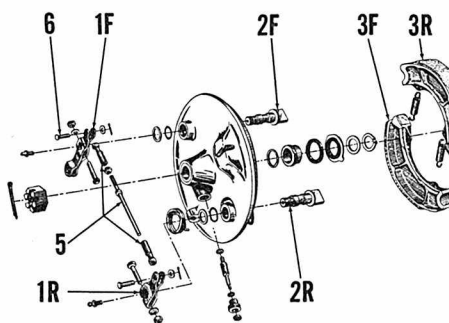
Exploded view of dual cam (full self-energizing) front brake assembly. This type is used on rear on some models. Front lever (1F) is actuated by hand control lever and turns cam (2F) expanding brake shoe (3F). Rod (5) connects the two levers together so that rotation of lever (1F) will also rotate lever (1R).
